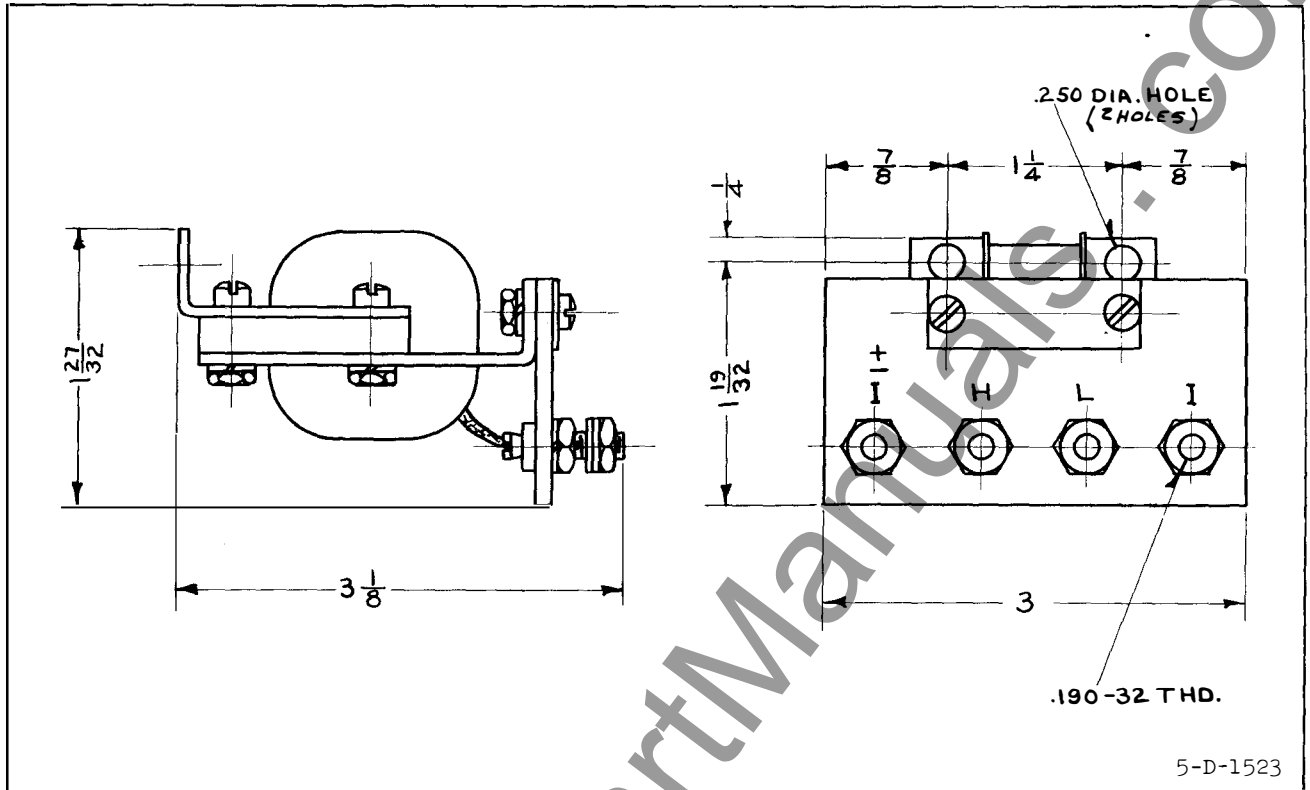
Outline of the Test Milliammeter Auxiliary Transformer. For Reference Only.
